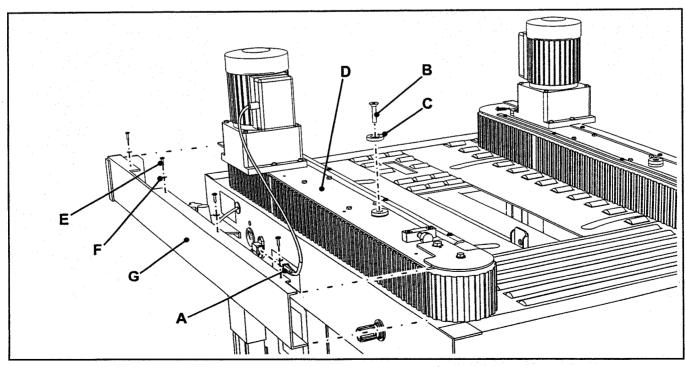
Box Drive Belt (Left Side View - Infeed End)
